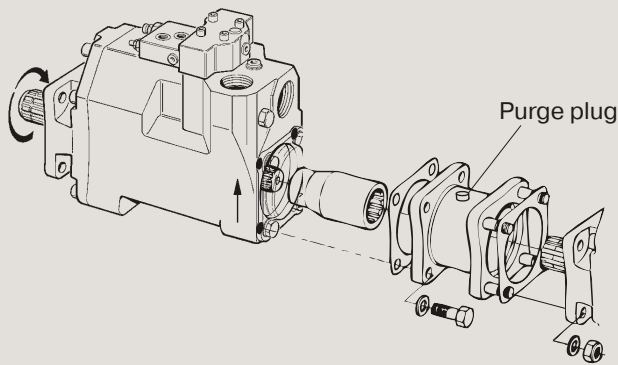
Adaptor kit (P/N 379 7795) for tandem coupling.
